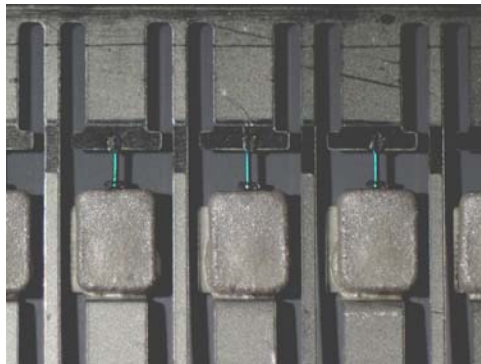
Capacitor Elements Assembled to Leadframe by Welding the Anode Wire and Curing the Silver Adhesive.
